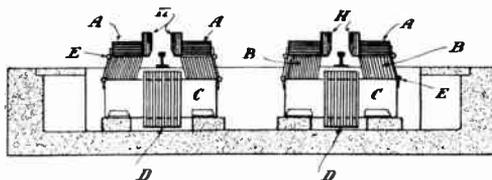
CROSS SECTION OF BRAKE AT ENERGISING MAGNETS.
